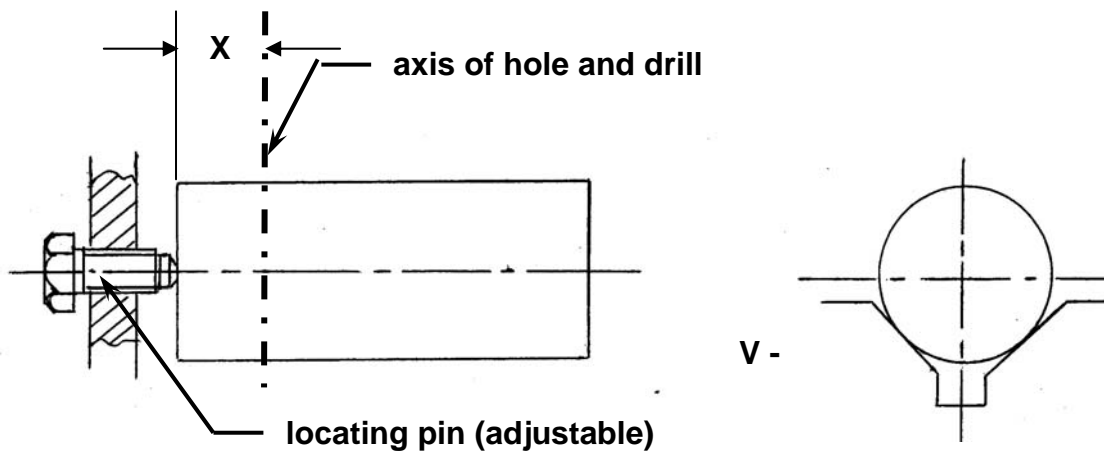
(b) locating by V – block and adjustable pin
